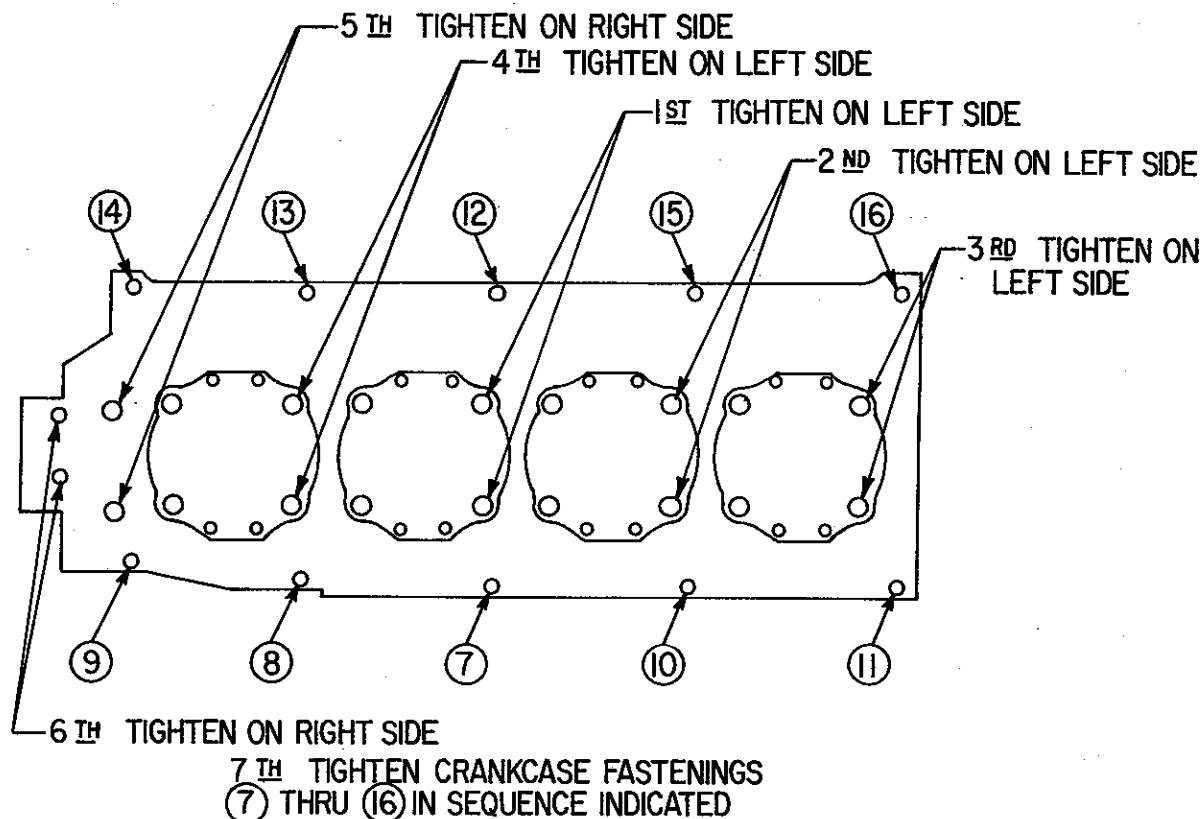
Crankshaft Tightening Sequence (Eight Cylinder Engines)
